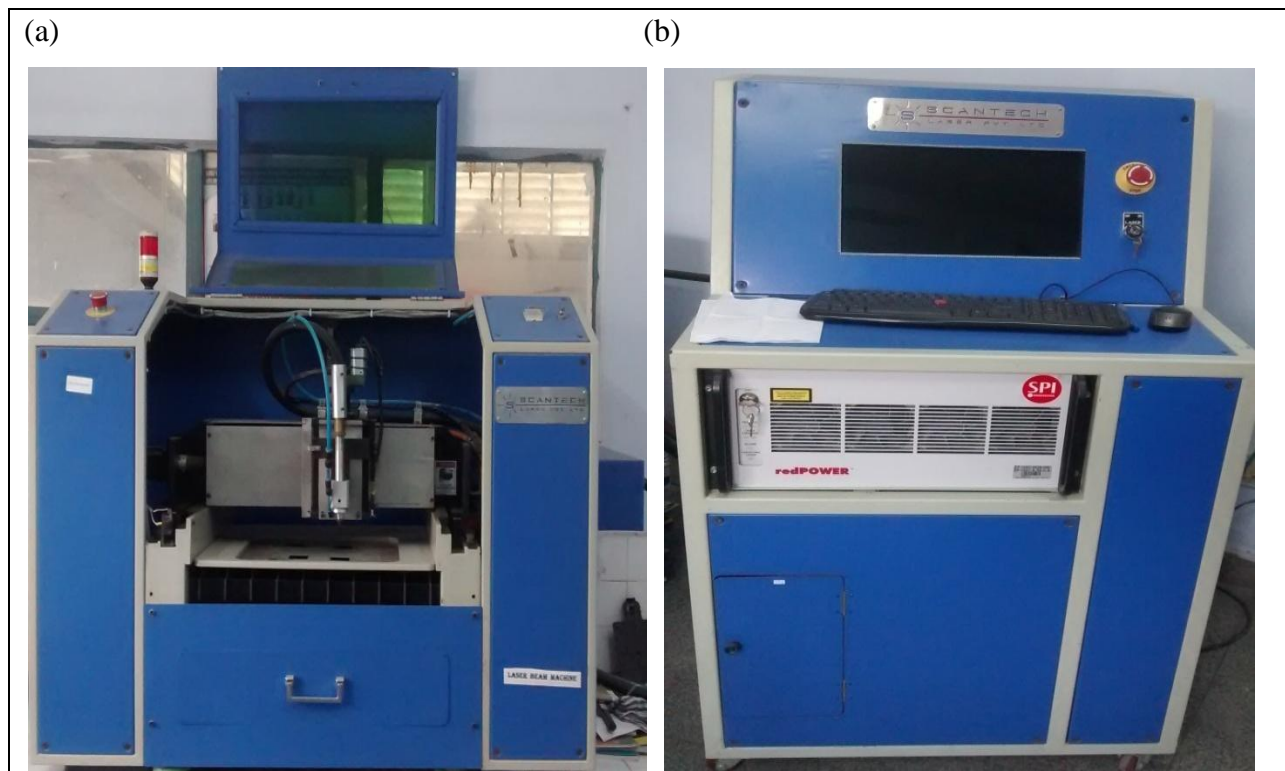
Experimental set up of Fiber laser machine (a) Fiber laser beam machine (PATRIOT 100, Scantech) [Machining Lab, Thapar University], (b) machine control unit of LBM
